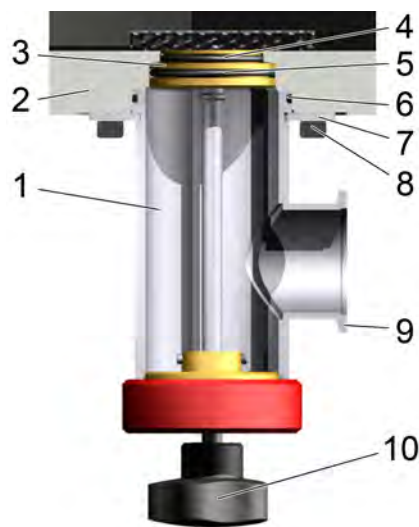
Mounting the Vacuum Valve at the Evacuated Cryostat
